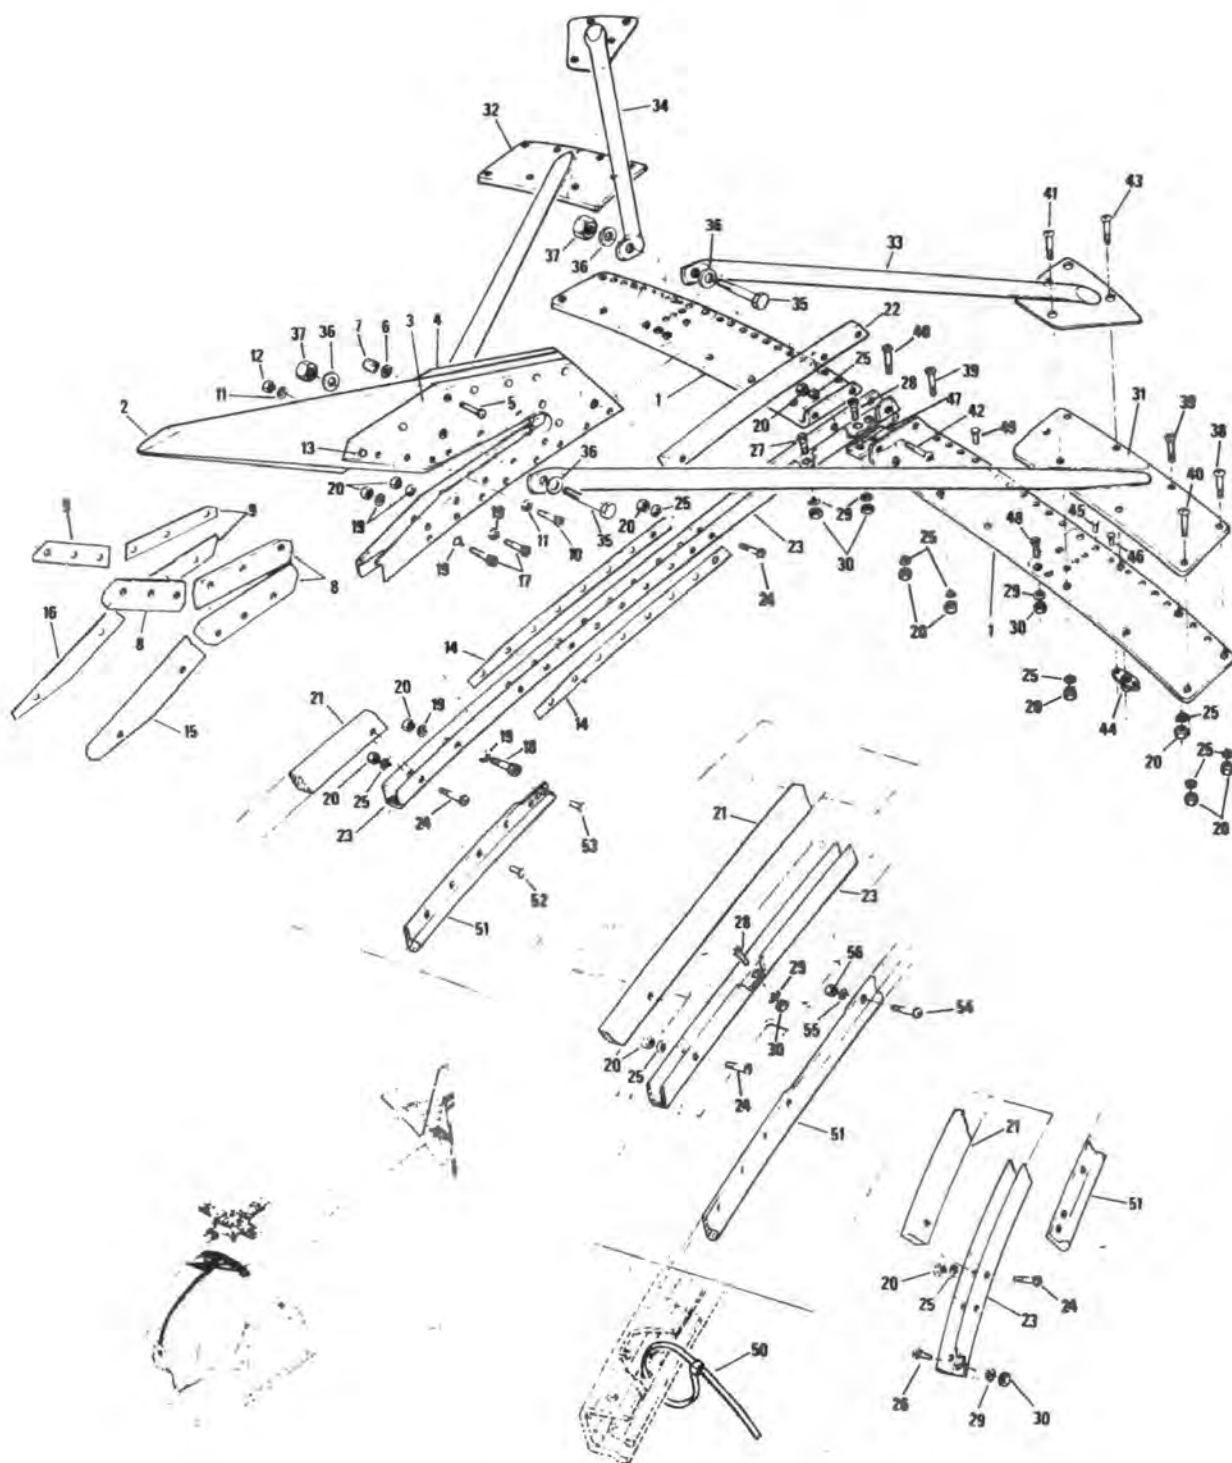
WSPS Parts Replacement Sheet 1 of 4
